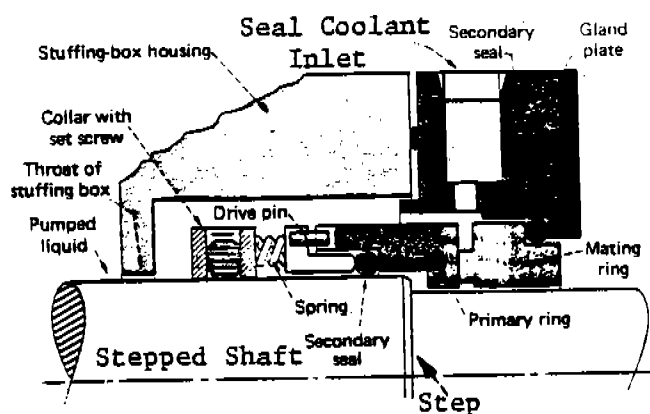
Balanced Internal Seal Showing Seal Coolant Inlet.
